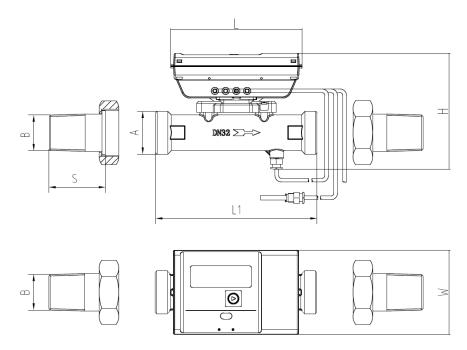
Outline dimension drawing Table 2-9 Outline dimension table
